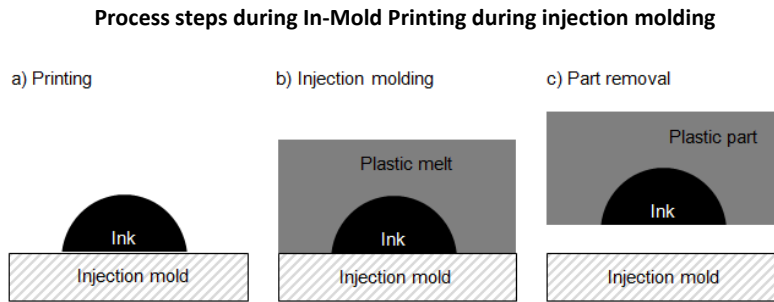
Transfer of the printed motive from the mold to the plastic part during injection molding [5]
